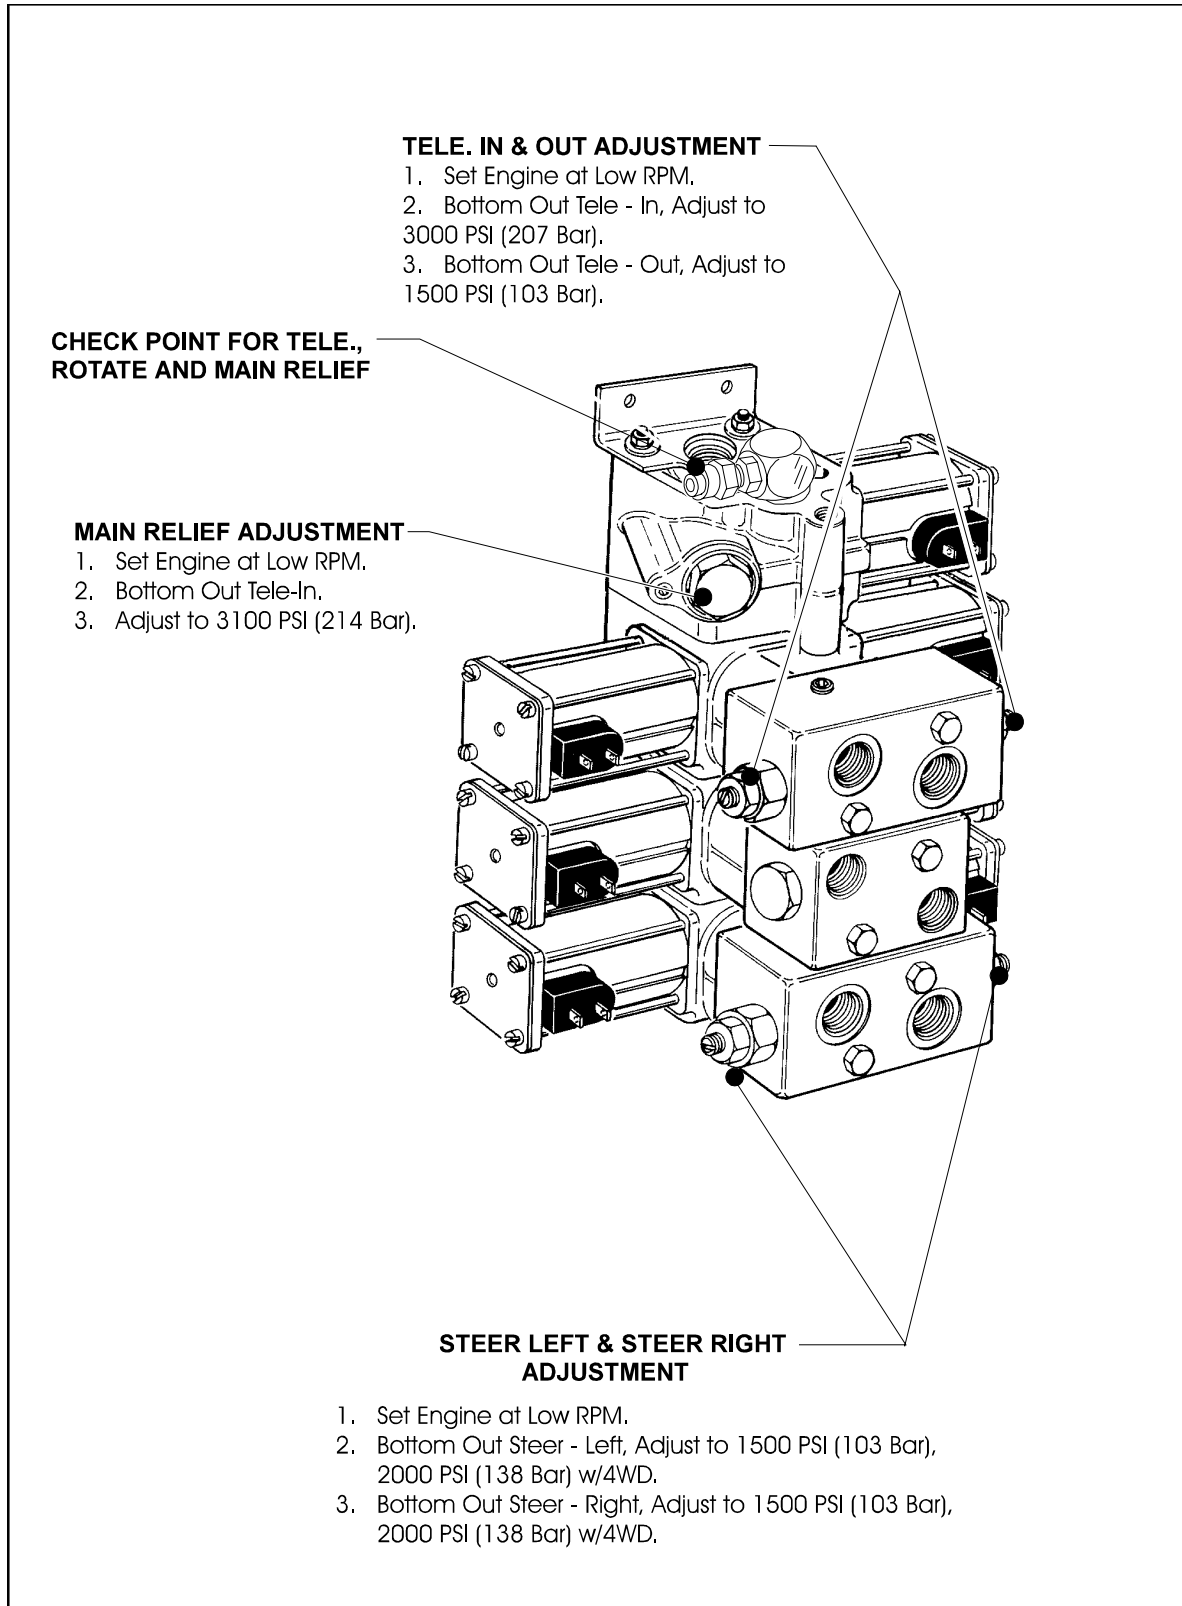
Solenoid Valve Pressure Settings - Machines Built to Present
